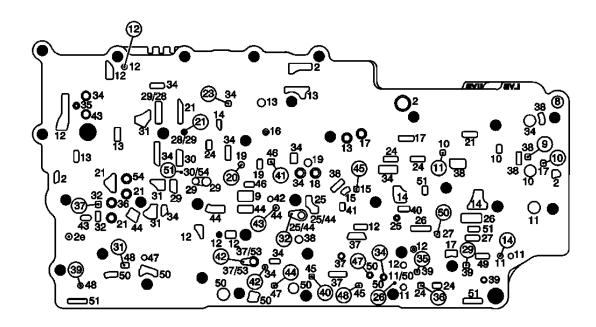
Identifying Control Solenoid Valve & Transmission Control Module Assembly Courtesy of GENERAL MOTORS CORP.
